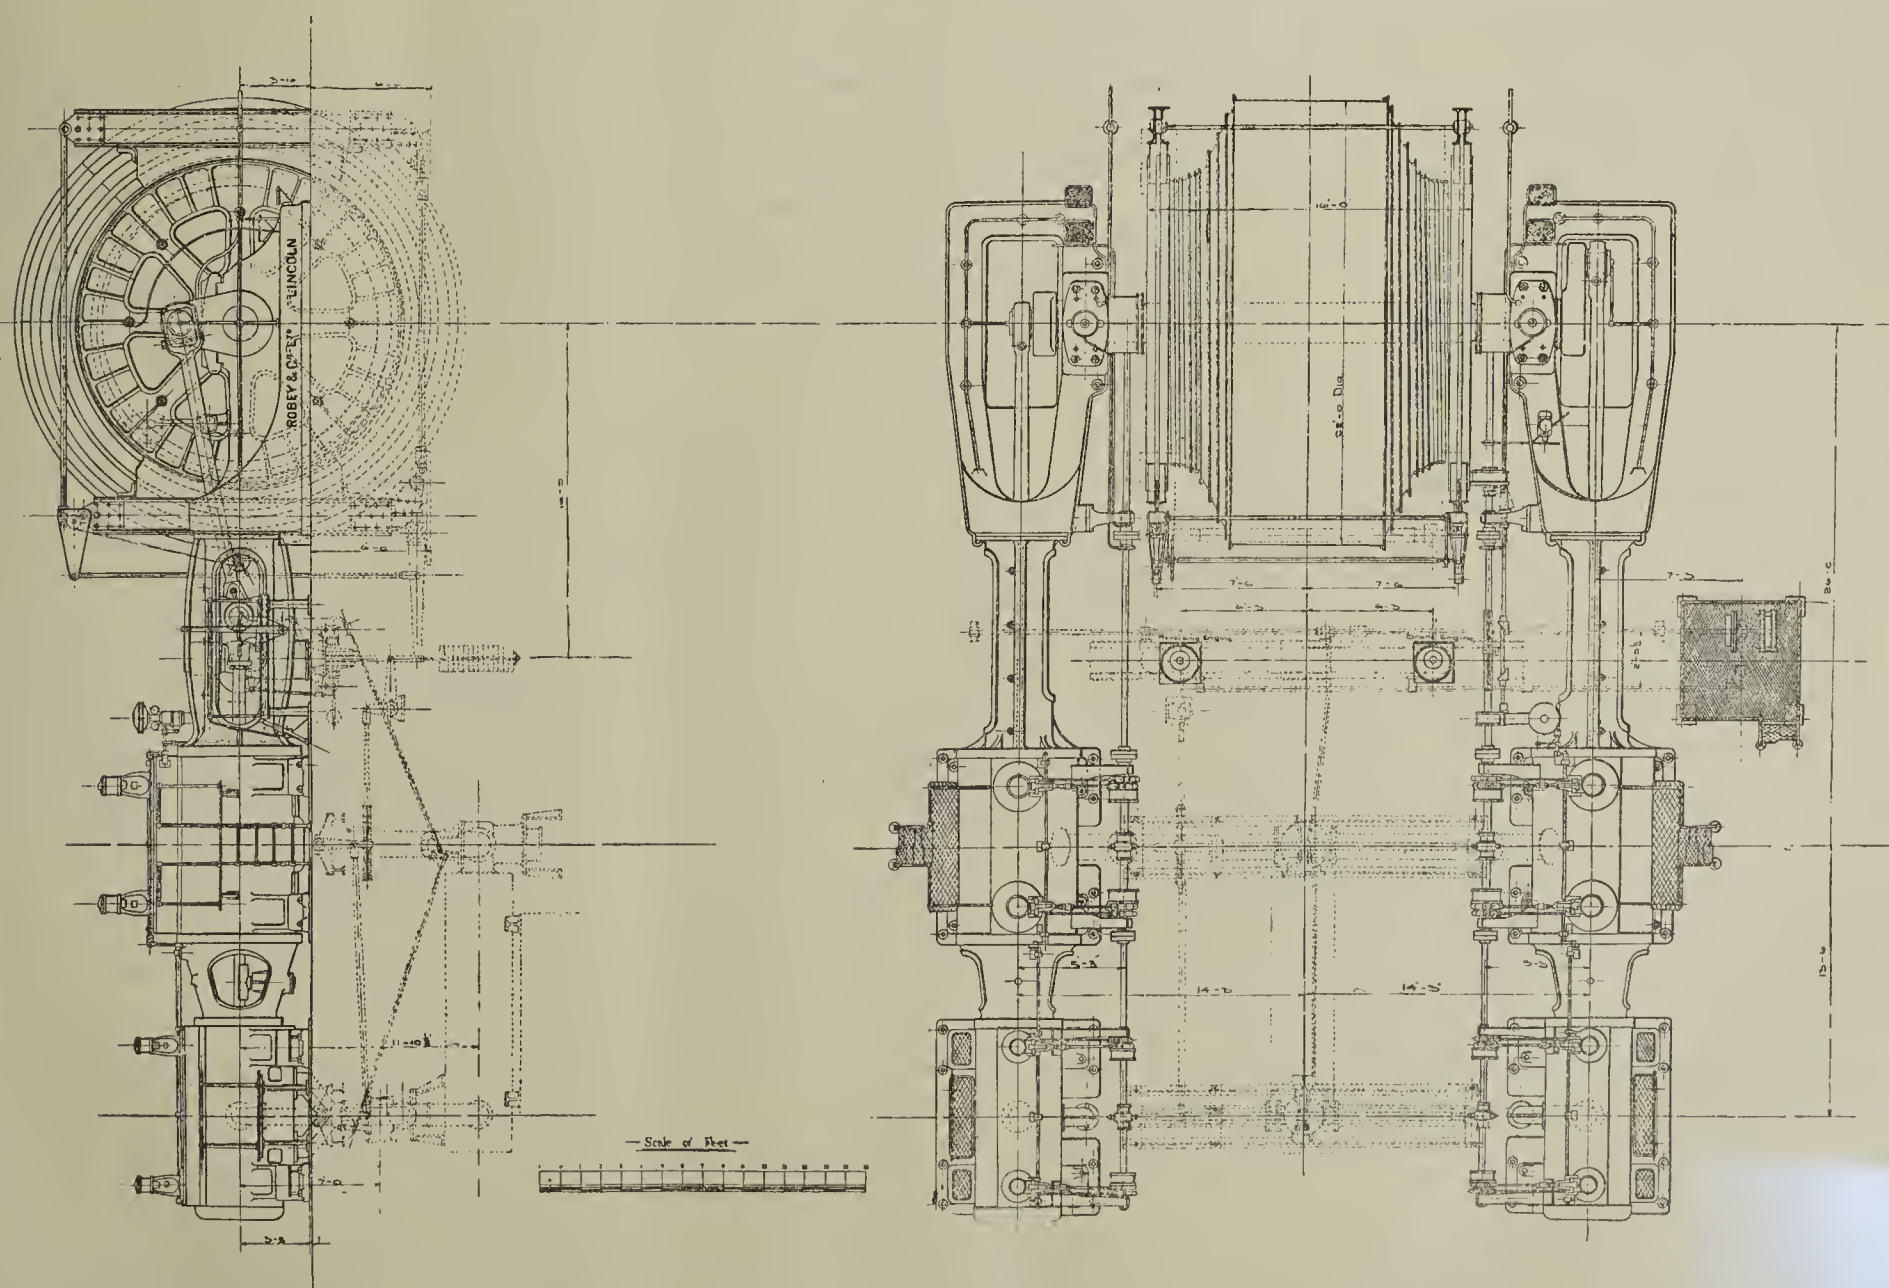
GENERAL ARRANGEMENT OF 31" & 52" 72" TWIN TANDEM DROP VALVE WINDING ENGINE.
